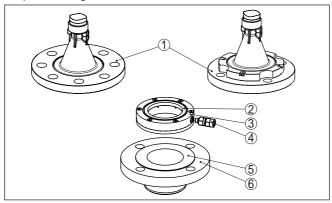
Mounting of the rinsing connection with compression flange and adapter flange ASME 3"
